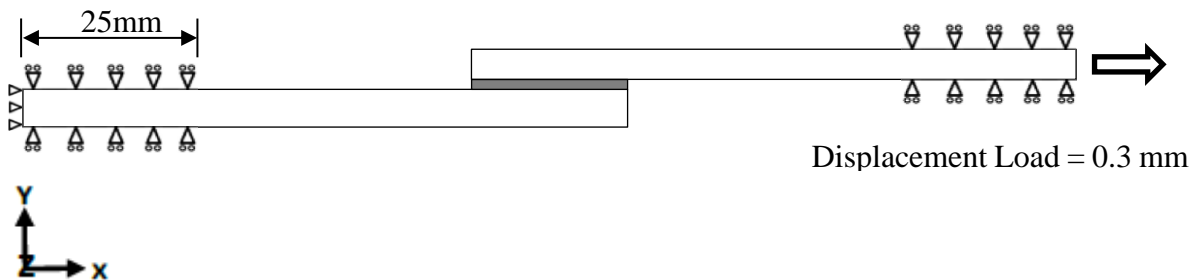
Boundary and Loading Conditions of Single Lap Joint SLJ (Not to Scale)
